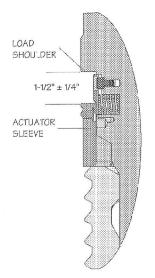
Detail of Load shoulder and actuator sleeve measurement
